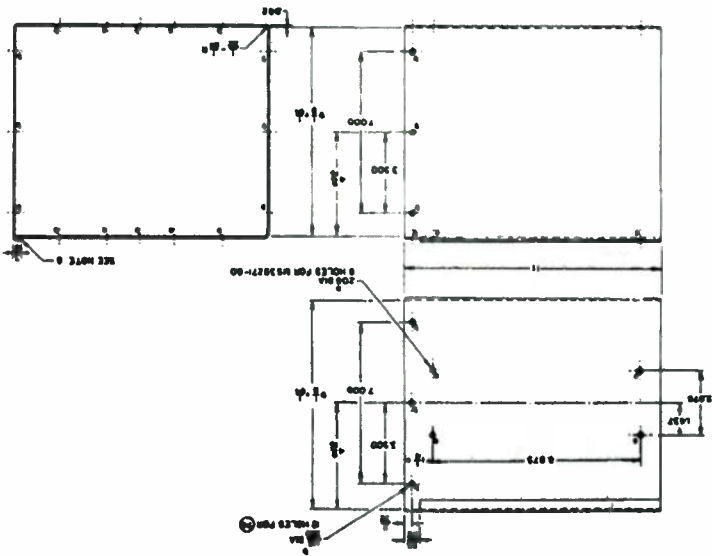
RF-De-insertion — loss-measuring equipment assembly.—Continued
